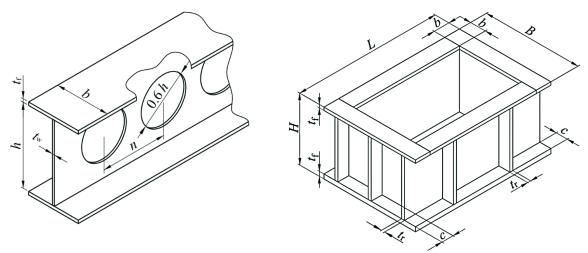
Schematic drawings of a welded I beam (left) and a gearbox housing segment (right)
